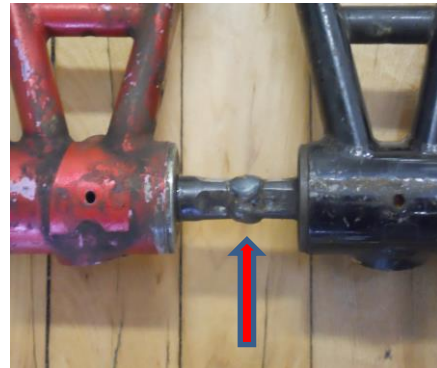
Welded connection between bottom brackets on drive side.
